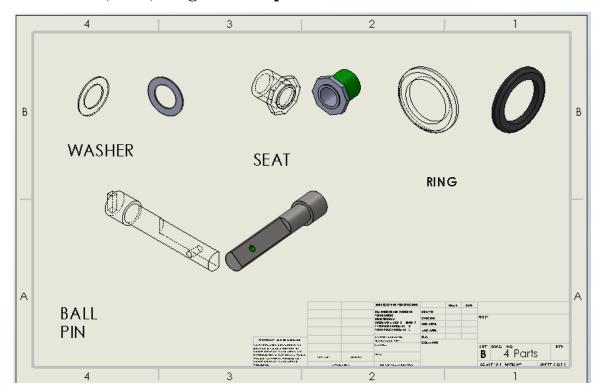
3-Dimensional Sketch of Washer, Seat, Ring and Ball Pin
